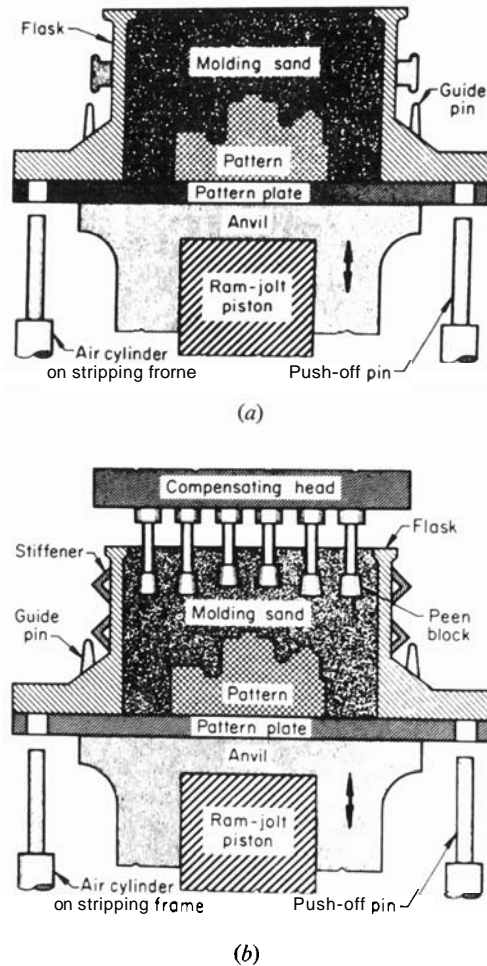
The essential features of: (a) a jolt-type moulding machine. The jolting action is produced by lifting the anvil and allowing it to fall back against a stop; (b) a jolt-squeeze moulding machine. After compaction by jolting, pressure is applied to the peen blocks (from Ref. 1, p. 164).
